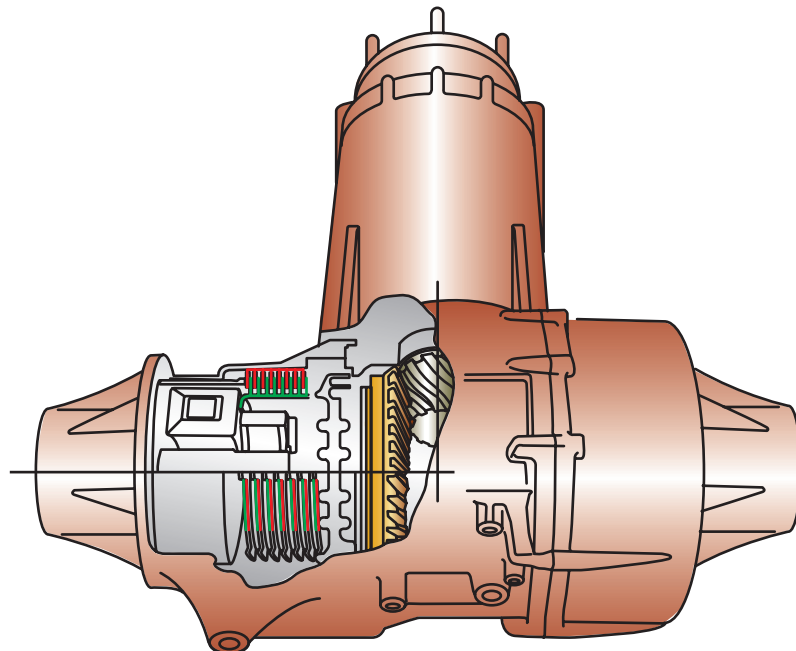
The differential and rear axle assembly for a Honda with SH-AWD.
